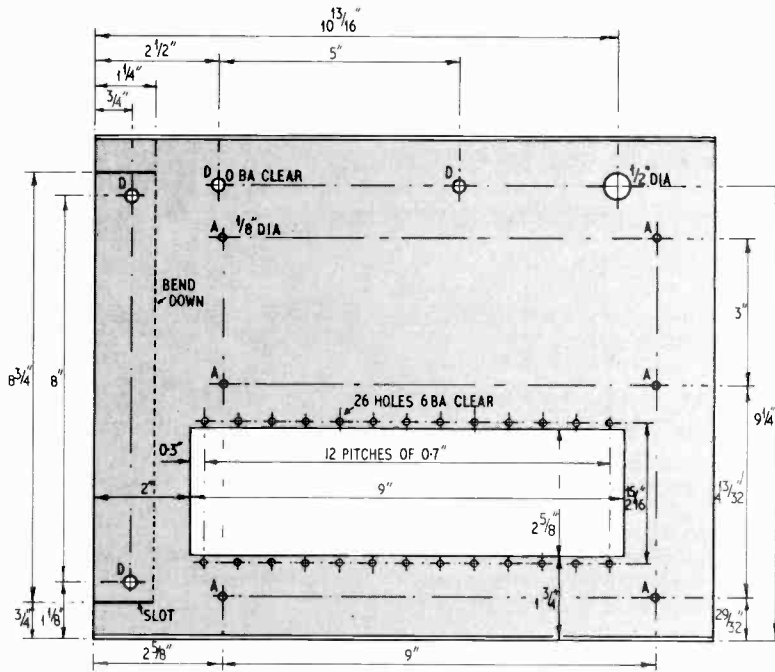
Cutting and drilling details for the main chassis plate. The front is bent down about half an inch to bring the display panel (to be described in Part 3) in line with the front panel
